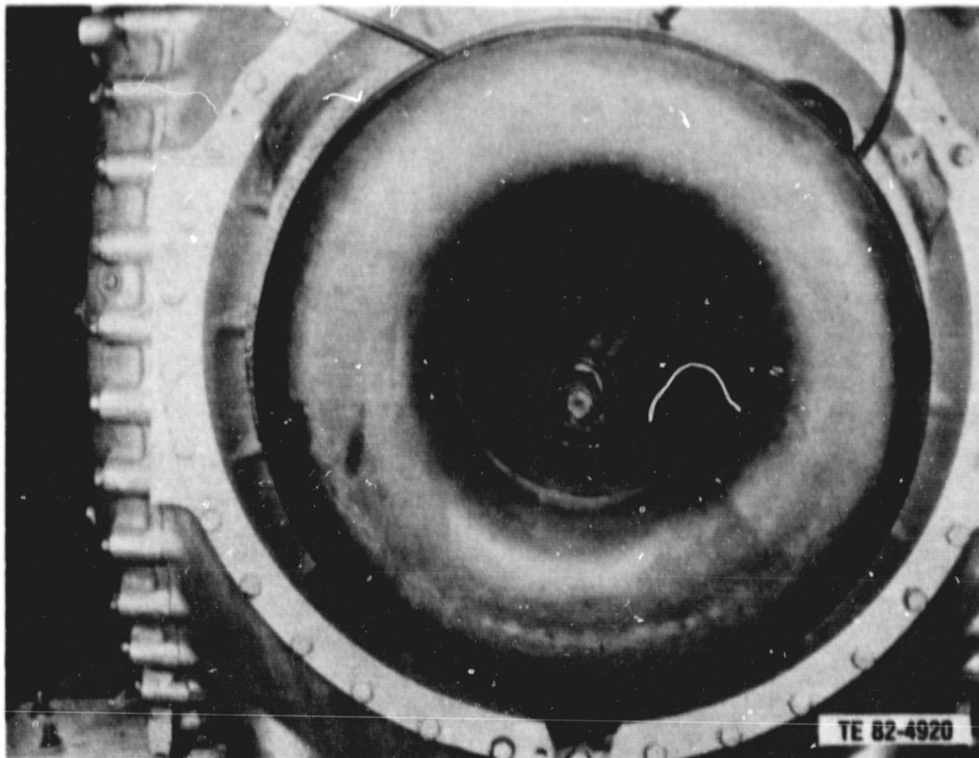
View of Greyhound engine S/N T9 inlet showing failure of compressor impeller (768 total engine hours).
